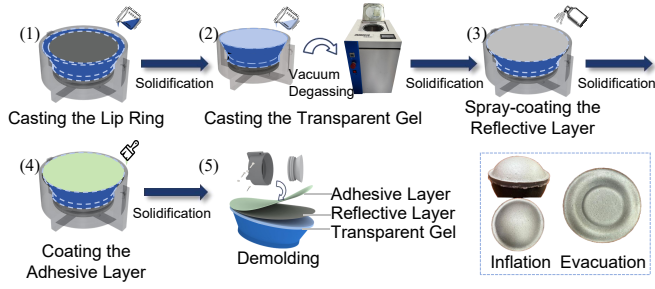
Fabrication of the Soft Suction Lip. The multilayer structure is fabricated through stepwise casting of silicone with different compositions.
